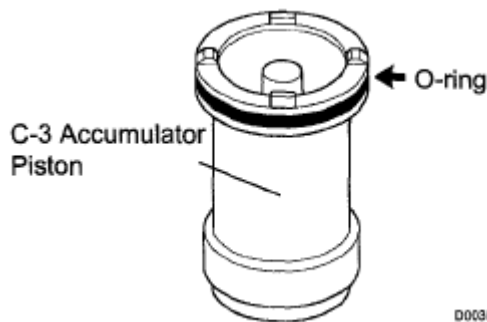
Locating C-3 Accumulator Piston O-Ring
